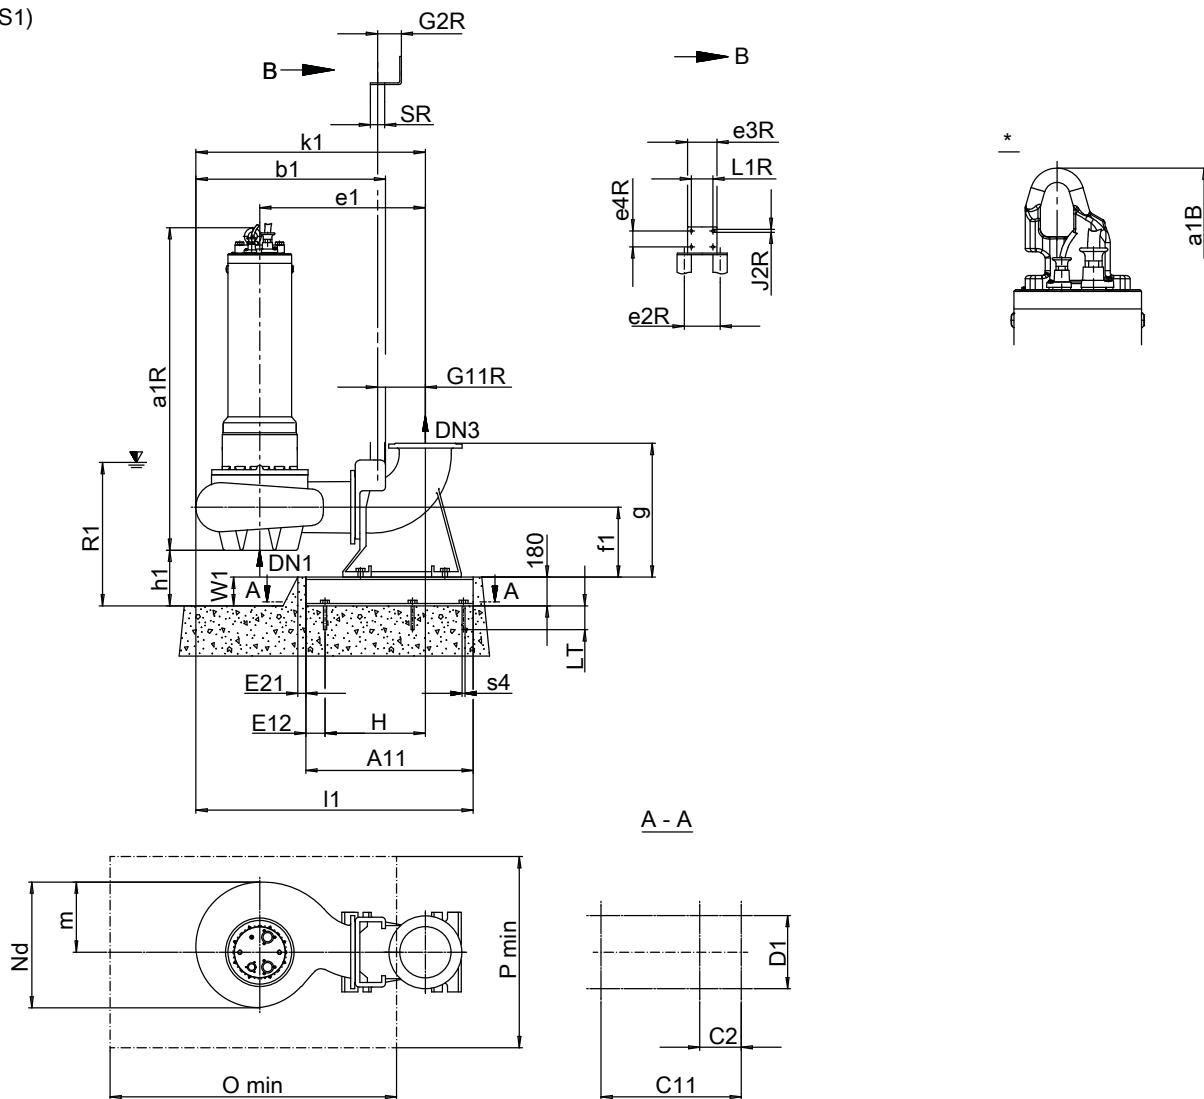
General arrangement drawing S1, stationary on duckfoot bend, guide rail arrangement, foundation with step, with foundation rail, large upper holder, motor version N
